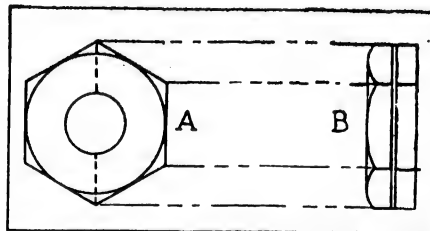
Illustrating How to Make a Simple Lock Nut.
